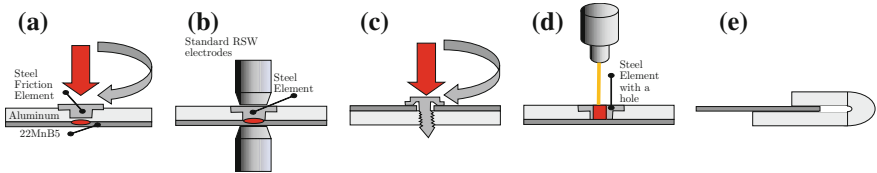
Schematic views of alternative joining methods for hot-stamped steel and aluminum joints: a friction element welding, b resistance element welding, c flow drill screw, d element arc welding, e hemming (re-created after [55, 67, 70])
